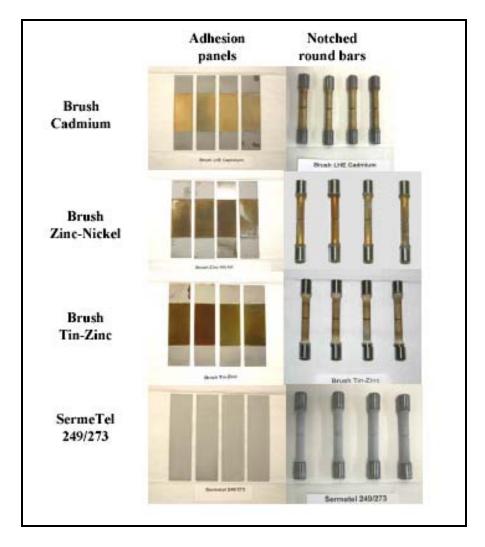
Coated Test Coupons Prior To Test – Repair Coatings
